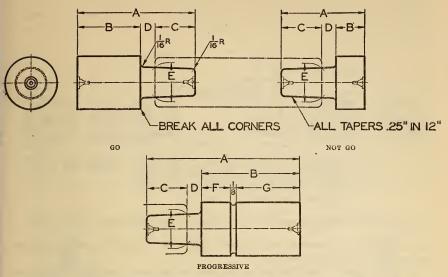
Plain cylindrical plug gages, above 0.240 to 1.510 inches, inclusive (optional above 1.510 to 2.510 inches)
